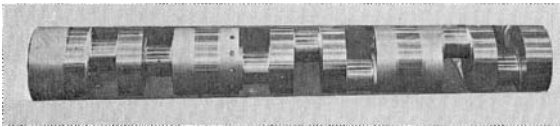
A crankshaft machined from a billet (Flowserve Corporation)
